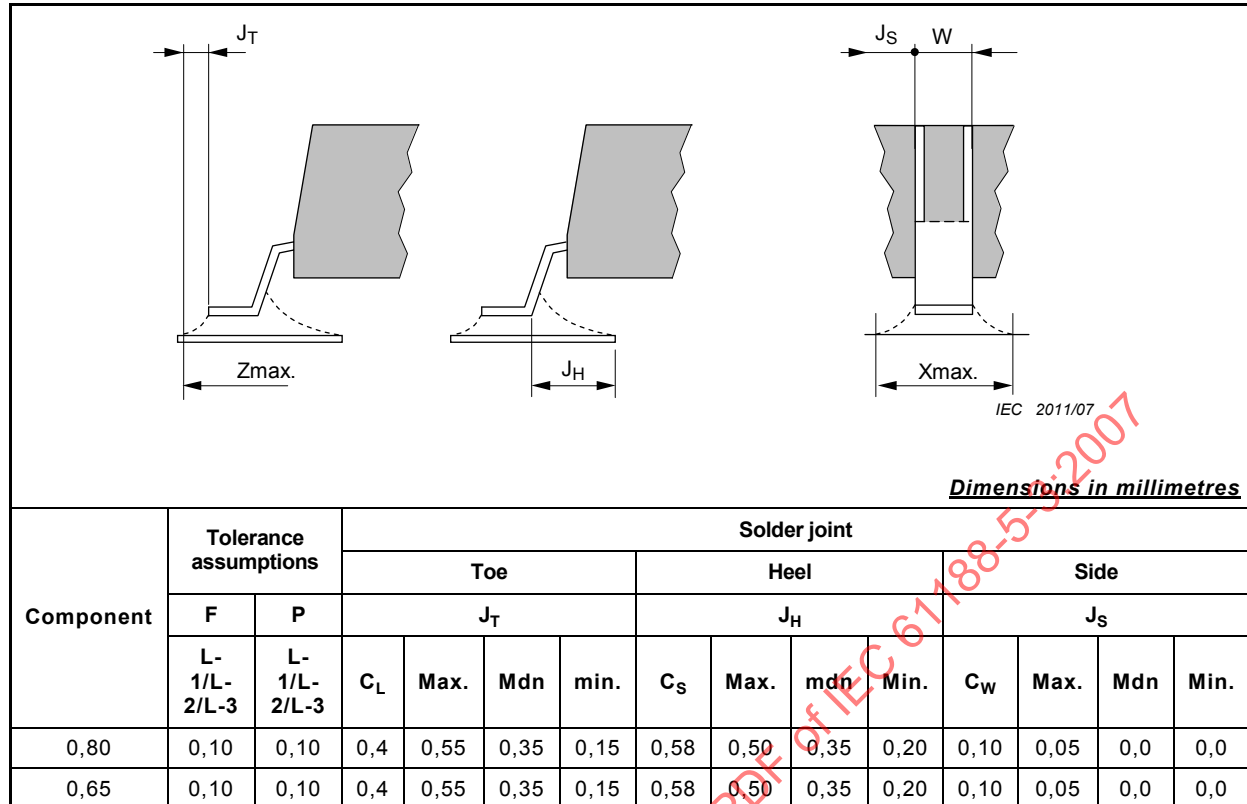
Solder joint fillet design (see IEC 61188-5-1, Table 2)
